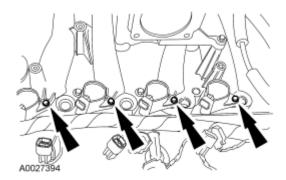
Ignition Coils & Bolts Courtesy of FORD MOTOR CO.
